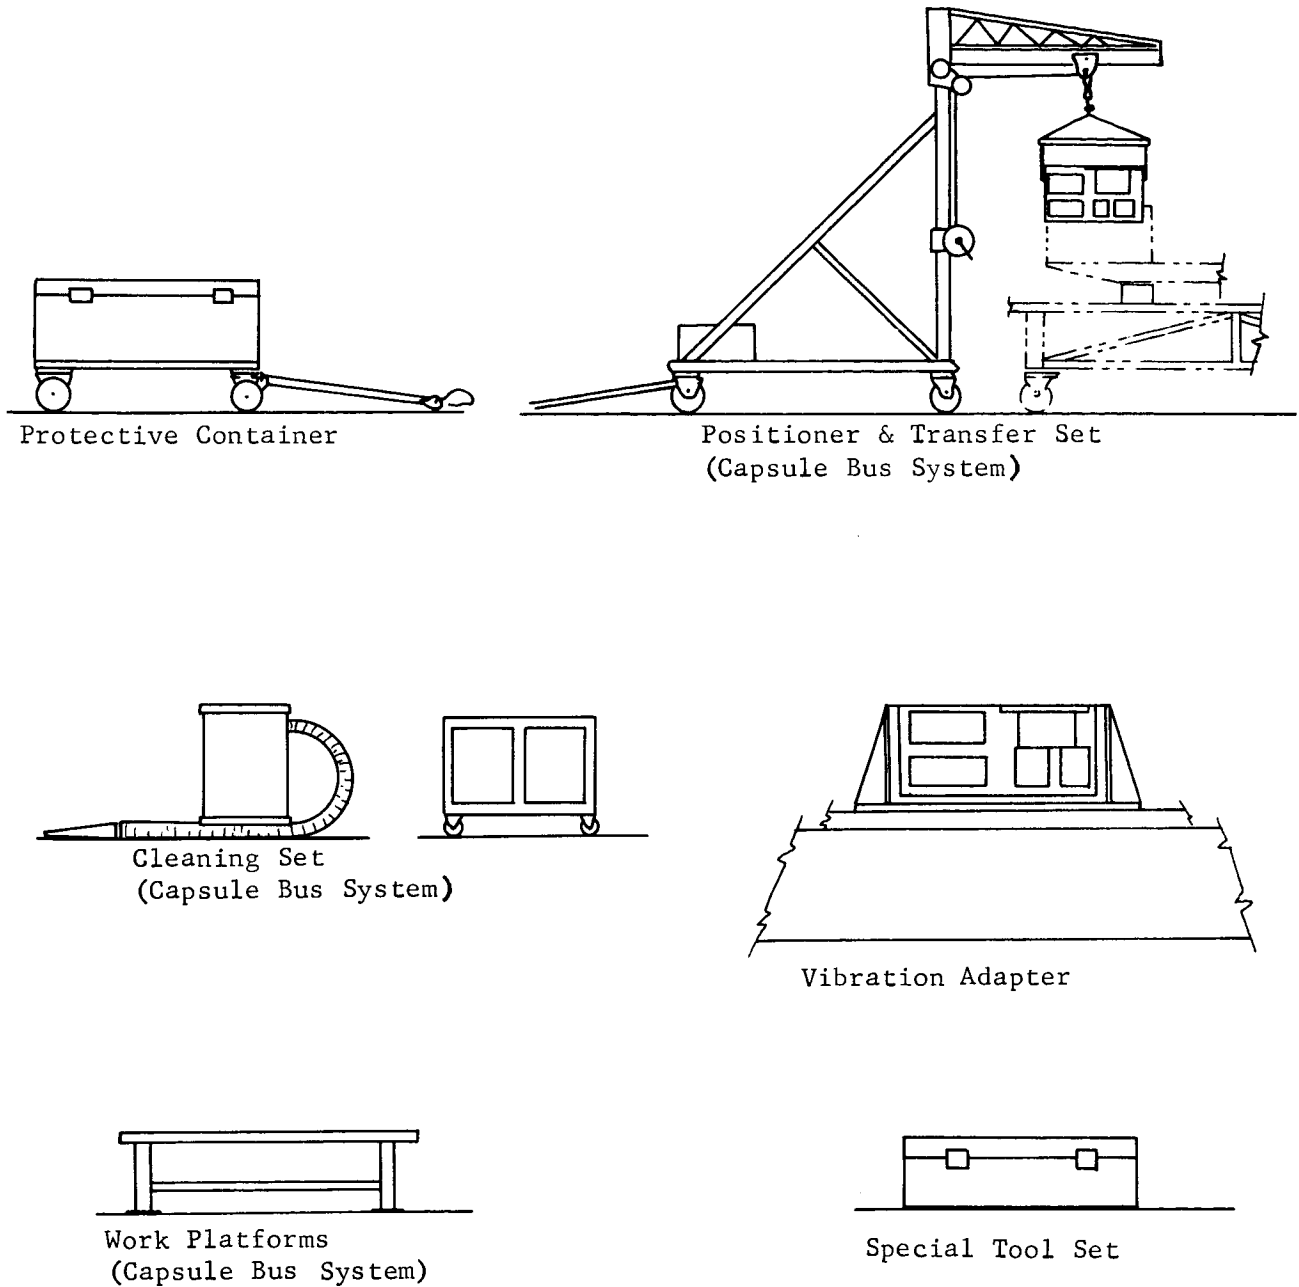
Entry Science Package Assembly, Handling, and Shipping Equipment
